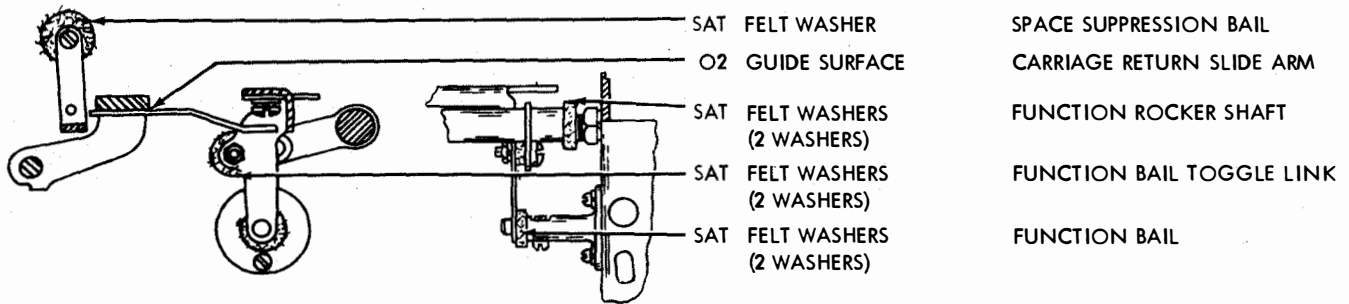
Function Rocker Shaft Mechanism, Rear View
